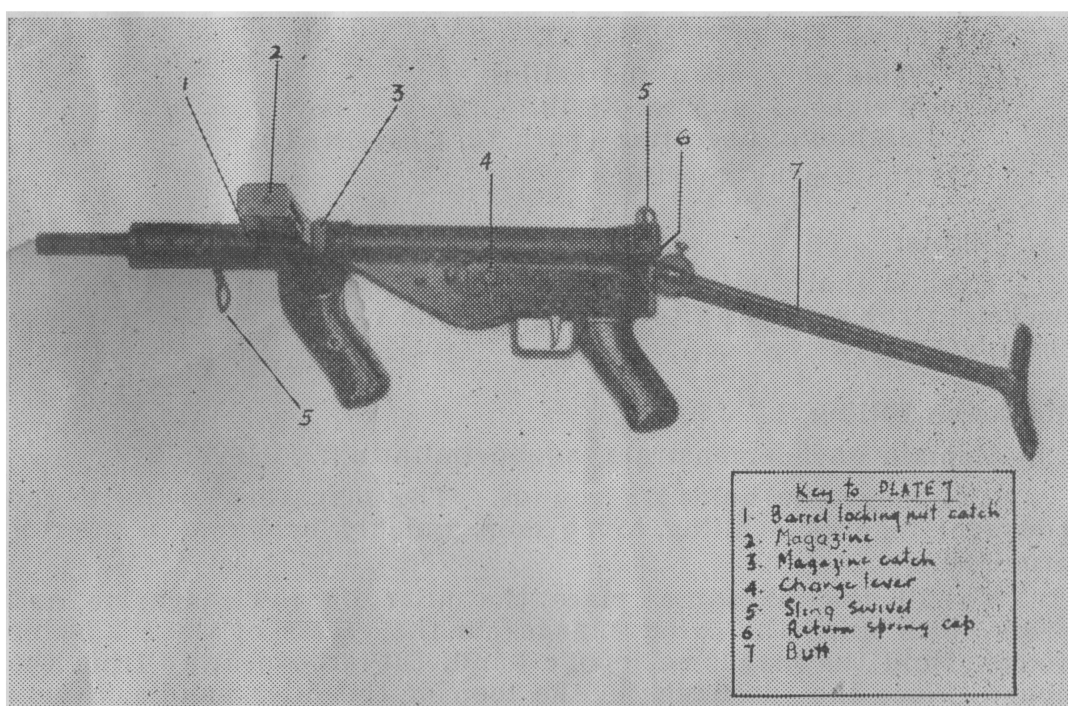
Austen Machine Carbine Mark 1 (Left Side).
